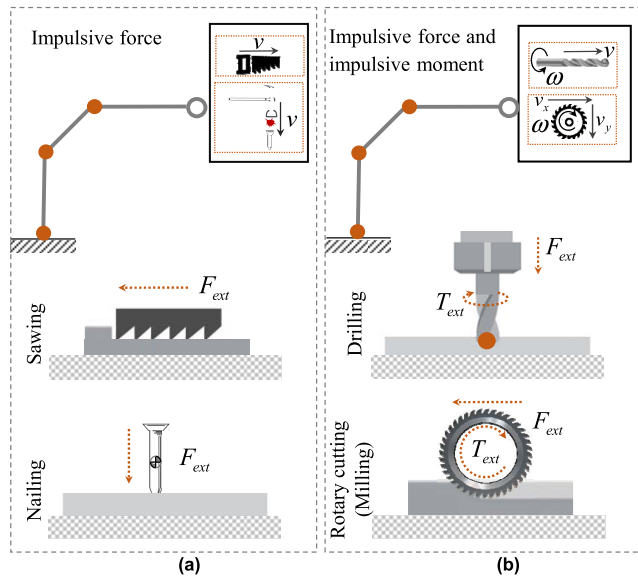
Impulsive motion-based machining tasks. (a) Linear impulsive motion-based machining task (b) Linear and angular impulsive motion-based machining tasks.
